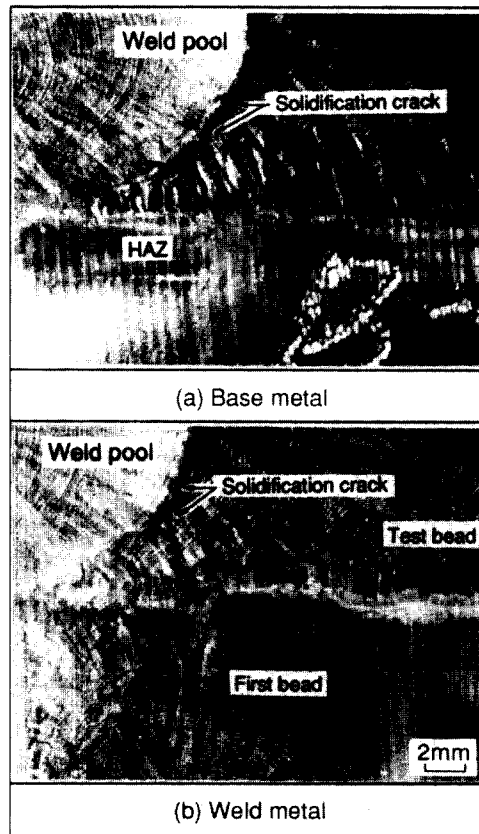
Typical appearance of cracks on surface of DS130B weld metal after the Longi-Varestraint test
